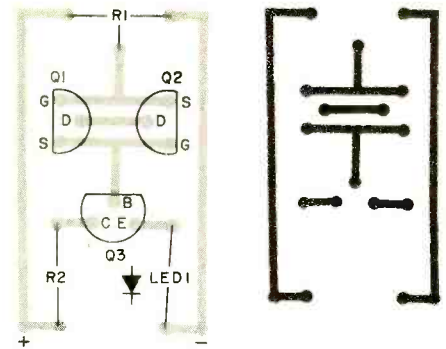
Etching and drilling guide (right) with component layout (left) can be used or a perforated board will do.
